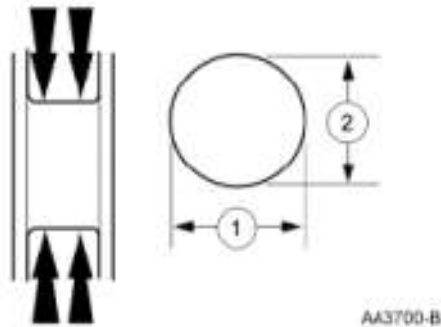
Measuring Crankshaft Connecting Rod Journal Diameters
